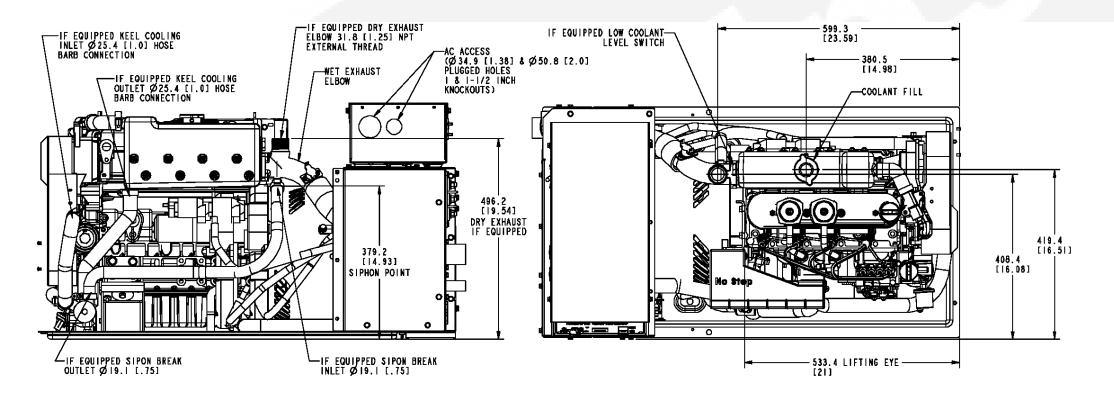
MDKBM AND MDKBN OUTLINE DRAWING (SHEET 1)
